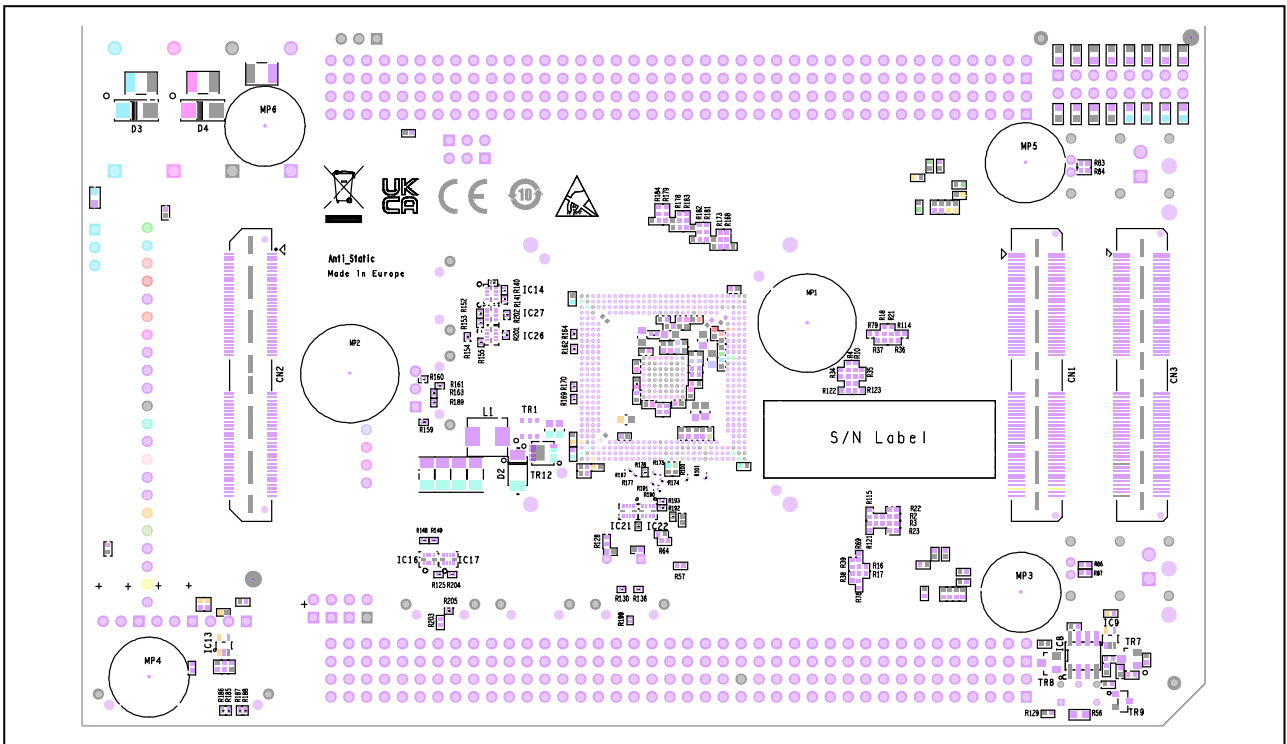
D018177_06_V03 Piggyback Board bottom view
